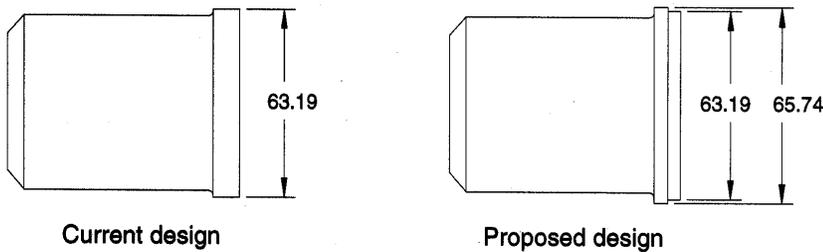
Proposed design change for hydraulic cylinder and plug. (Dimensions in millimeters)
